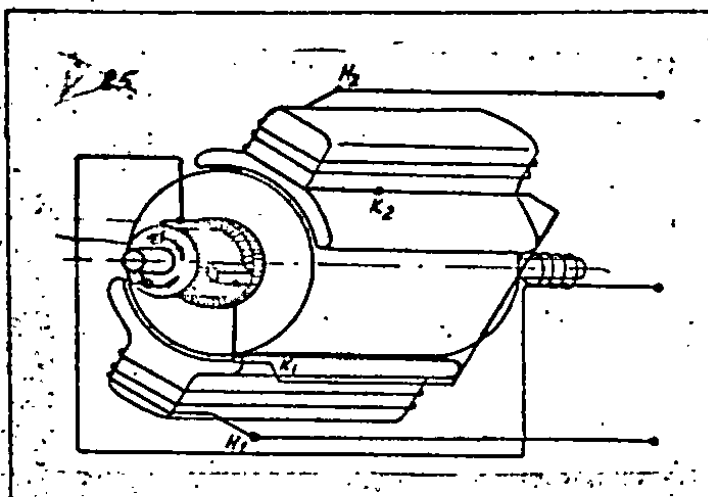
Diagram of the Electromotor D-125W of MO-2 Mechanism.
